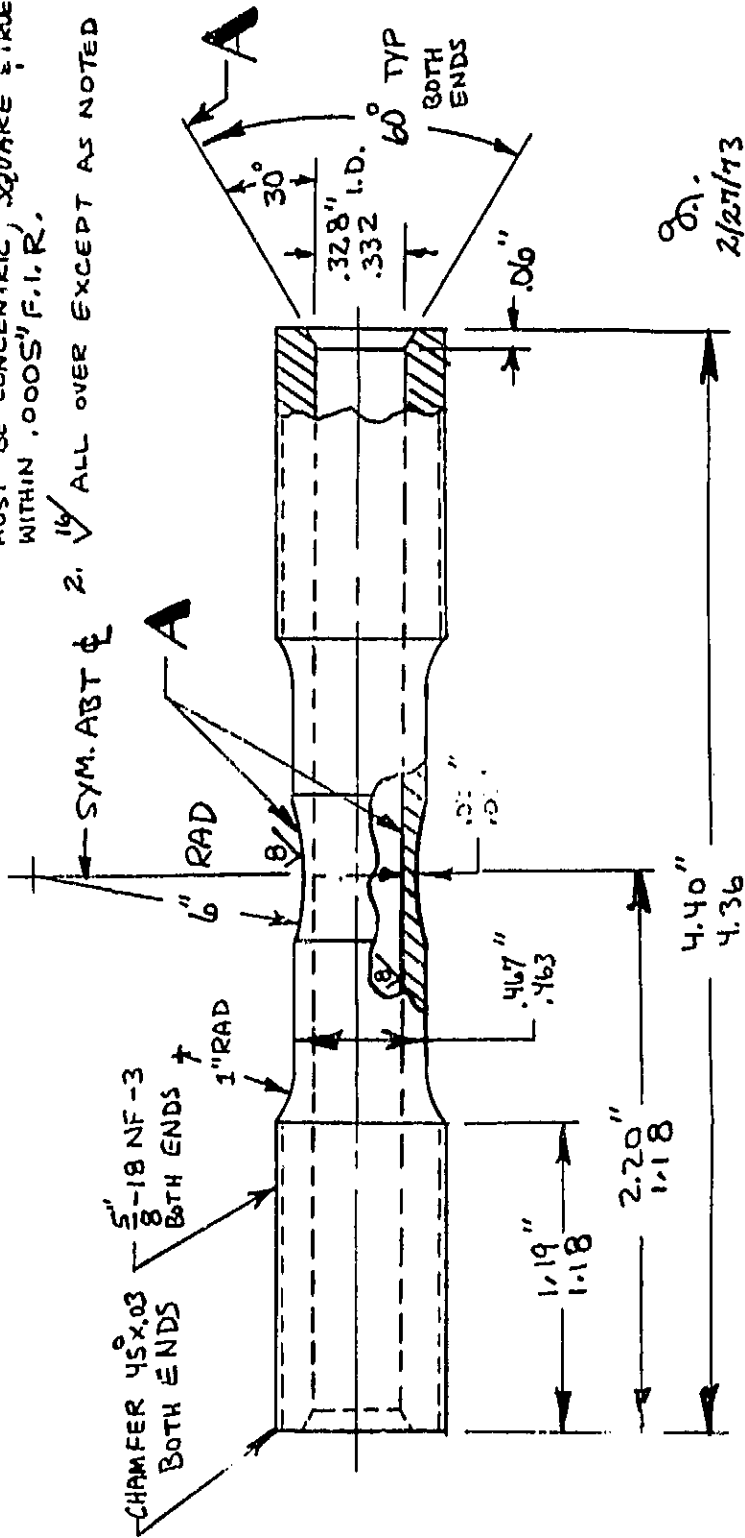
Thermal-Mechanical Fatigue Test Specimen.
